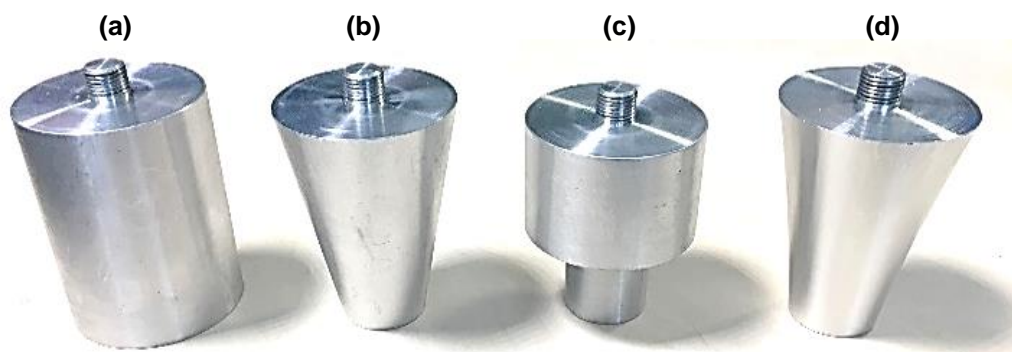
Manufactured (a) cylindrical, (b) conical, (c) stepped and (d) exponential ultrasonic horn
